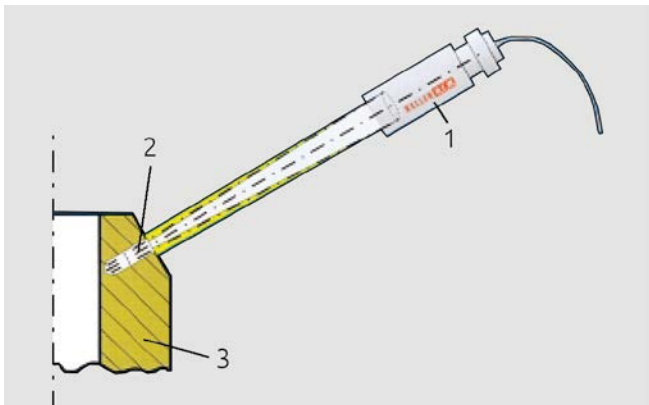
The pyrometer with optical sensor head and spot light 1 is adjusted to the "measuring cavity" 2 of a press-and-blow mould 3.
